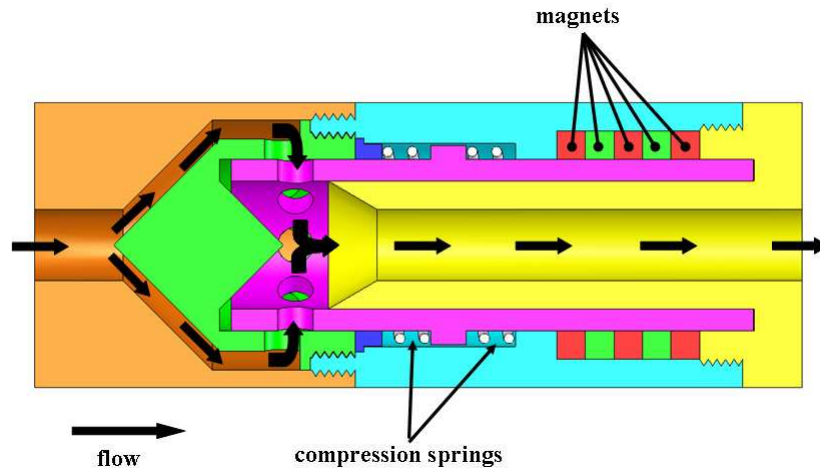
Preliminary integrated valve and actuator design for metal-bodied prototype TV1.
